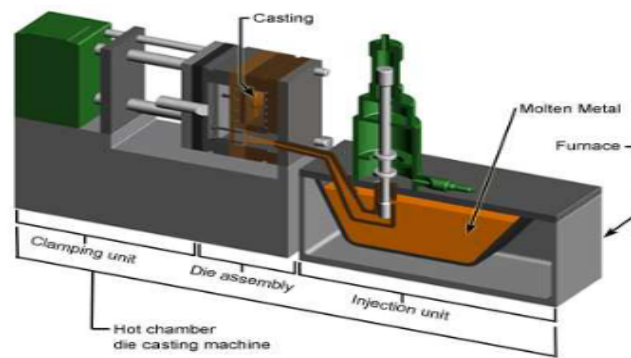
Representation of a Die Casting Machine by Hot Chamber in Graphic View [28]
